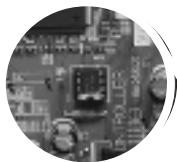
Remove the main controller PCA assembly (6 of 6)
